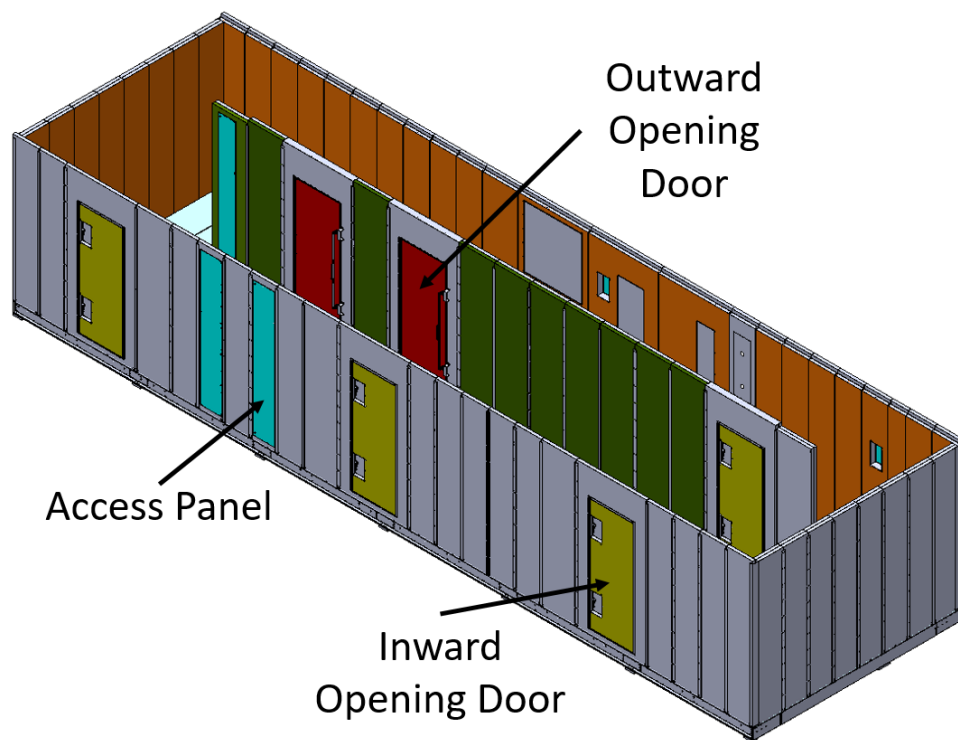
Final arrangement of external and internal airside subsystem walls.
